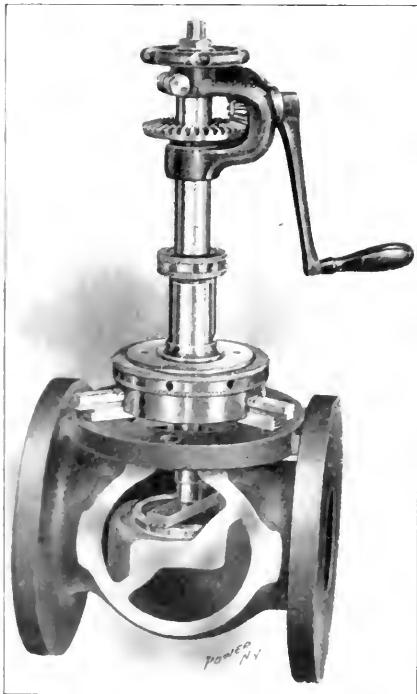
APPLIED TO LARGER GLOBE VALVES
